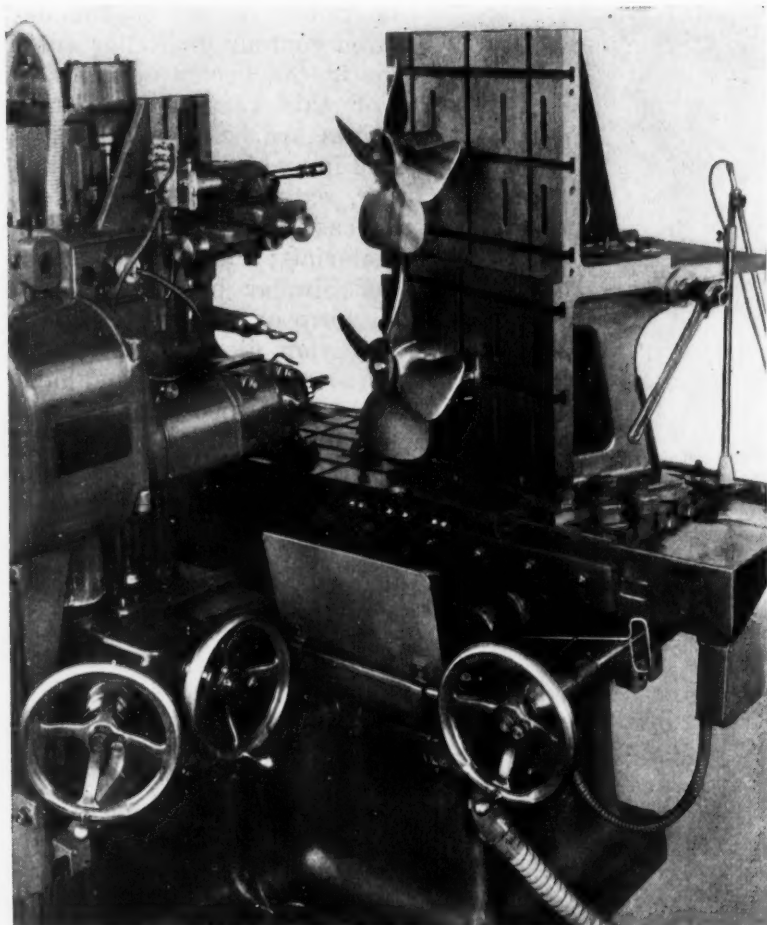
(Left) Automatically Milling the Blades of a Boat Propeller by Using a Finished Propeller as a Master for the Tracer that Governs the Cutter Movements of Keller Machines
